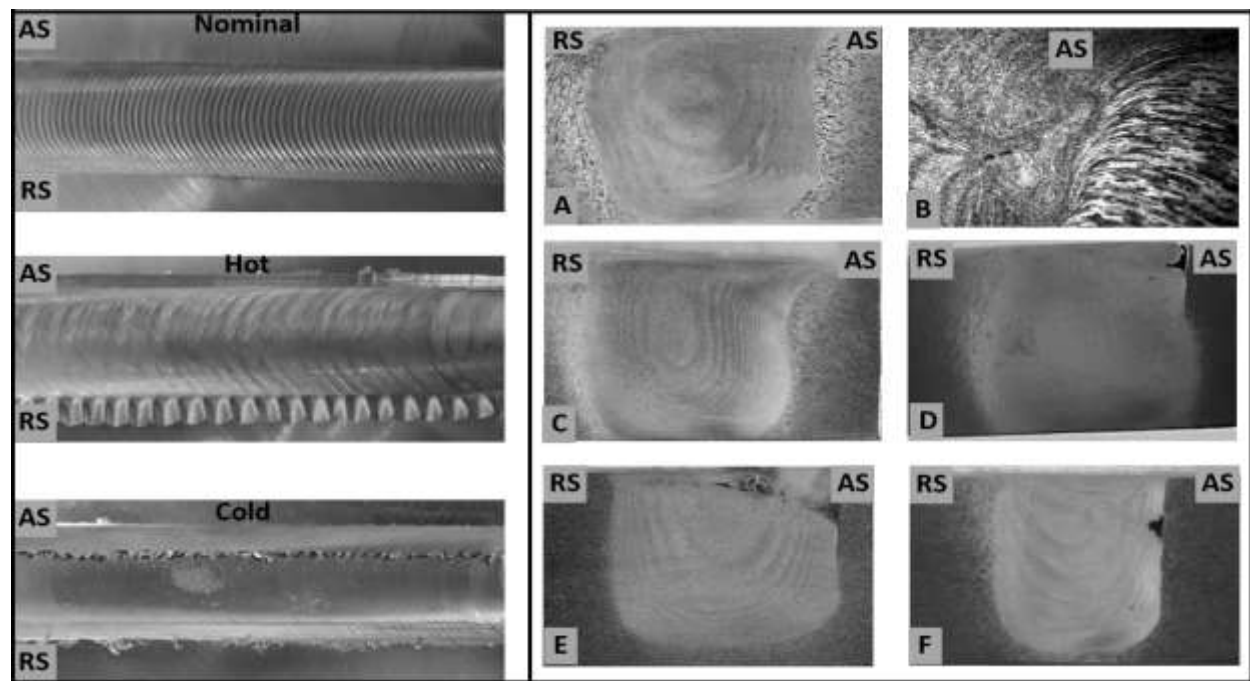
Left: Top views of friction stir welds: Nominal weld shows well defined ripple pattern. Hot weld shows flash on retreating side, irregular (flash-related) variations in ripple pattern, and lack of fill on advancing side. Cold weld shows defect inside crown suppressed ripple formation and sporadic, small extrusions on retreating side. Right: Transverse sections of friction stir welds: (A) Nominal weld, (B) Internal void on AS, (C) Underfill, (D) Incomplete joining of weld seam at crown, (E) Trenching on advancing side of crown and lack of penetration at root, (F) Wormhole on advancing side and lack of penetration at root.
